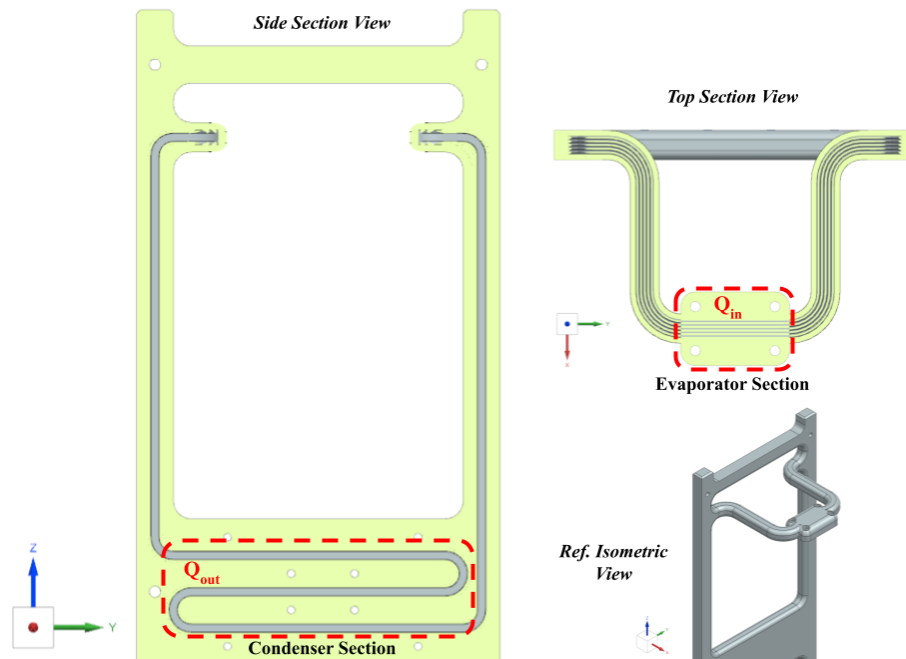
Cross-sectioned Views of Current Heat Pipe Structure
